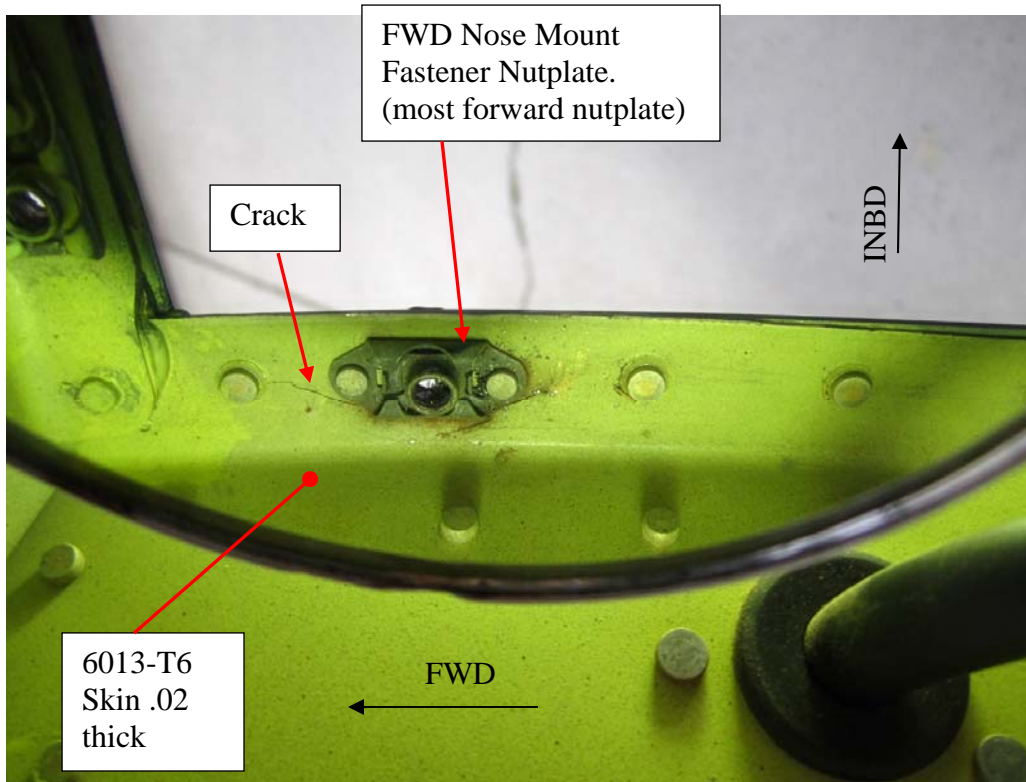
View (looking Down) Showing the LH Side Forward Fastener with Crack Damage
